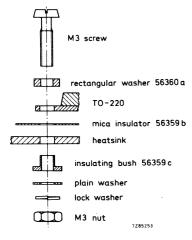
Insulated screw mounting with rectangular washer. Known as a "bottom mounting".
